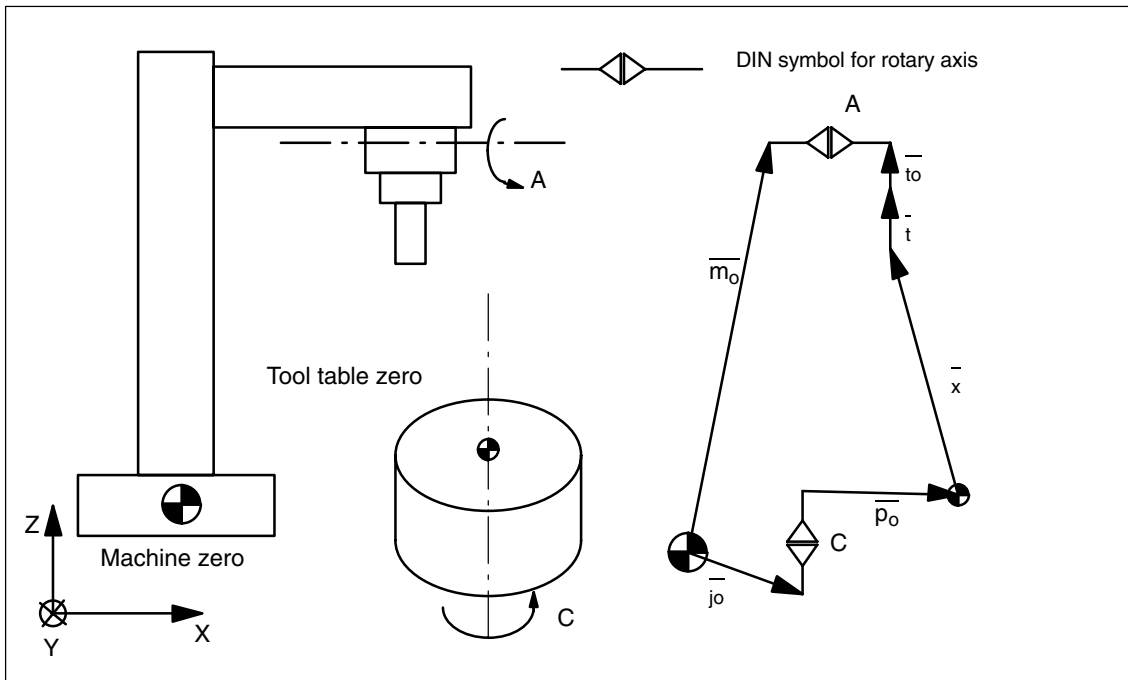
Schematic diagram of AC kinematics, moved tool, moved workpiece
